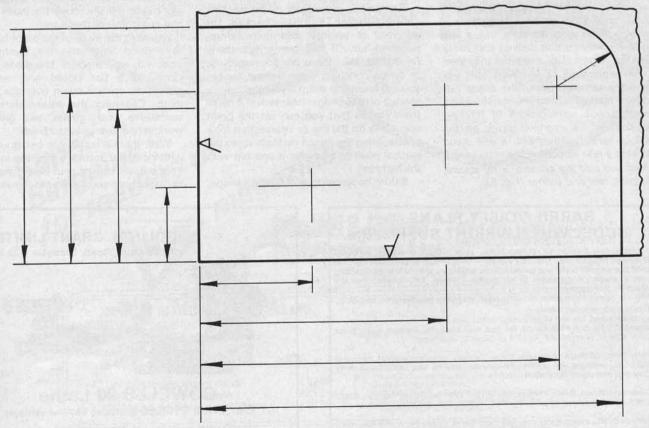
Workpiece dimensioned from Datum edges.
